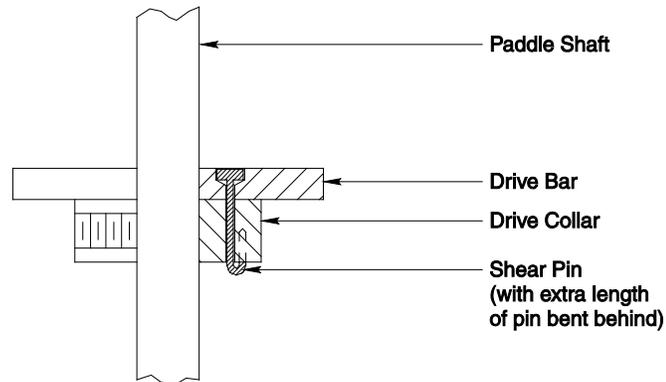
Shear Pin inserted through Drive Disk and Bar
